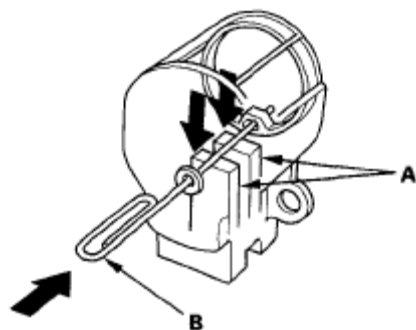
Pushing Brushes In And Inserting Pin Or Drill Bit To Hold
